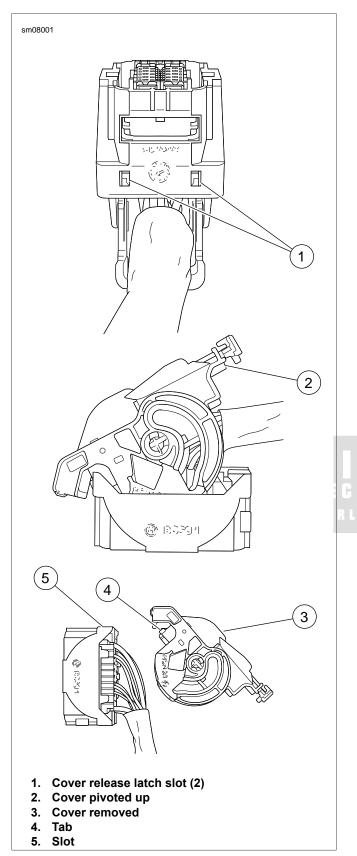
Removing Bosch BTC Sealed Connector Cover
